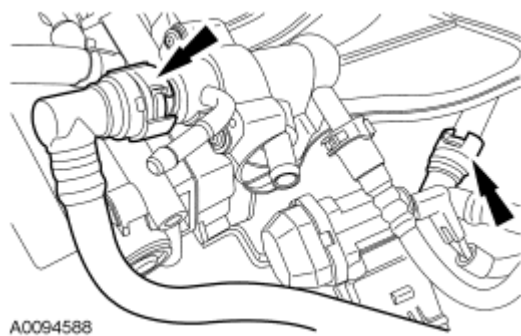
Locating Positive Crankcase Ventilation (PCV) Tube
